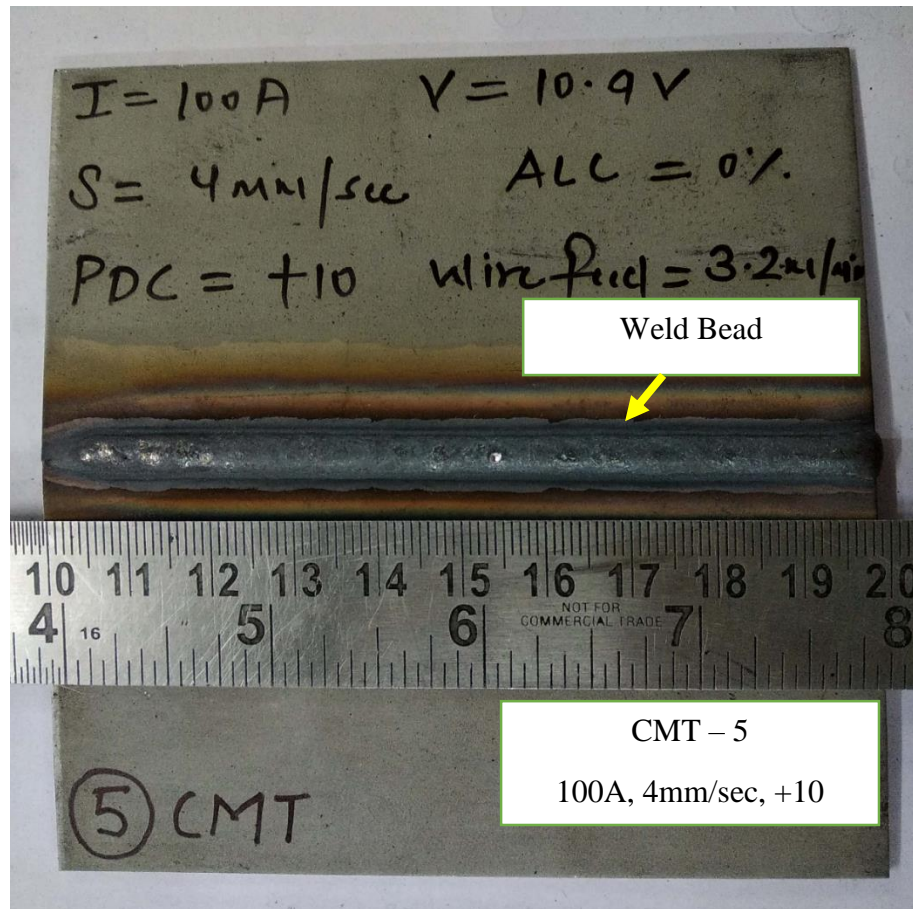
Image of CMT welded SS202 Sample 5 of thickness 1.58 mm
